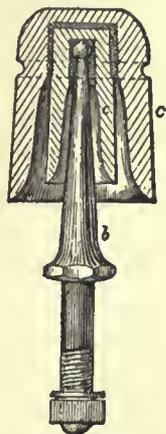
Varley's Double Cup Insulator, one-fourth full size.
